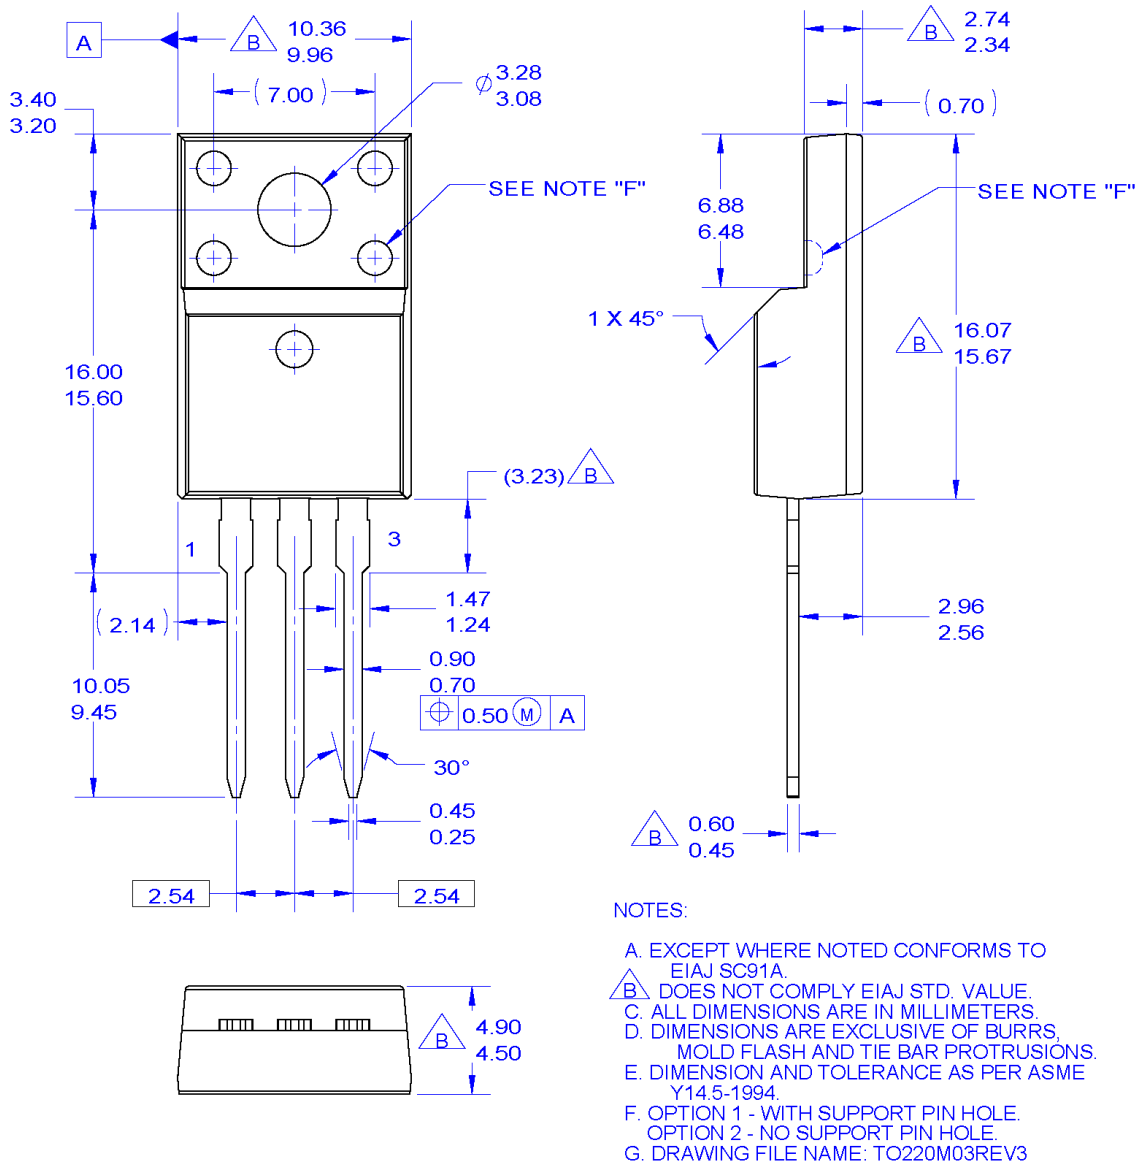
TO-220F 3L - TO220, MOLDED, 3LD, FULL PACK, EIAJ SC91, STRAIGHT LEAD
